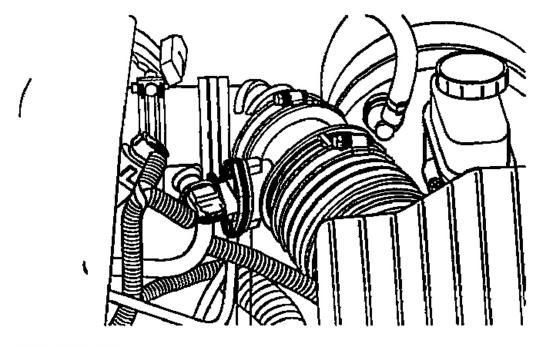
Identifying Air Cleaner Components Courtesy of KIA MOTORS AMERICA, INC.
